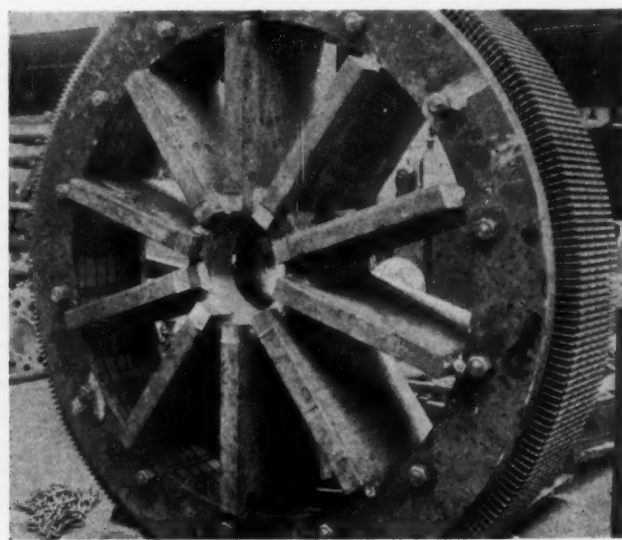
LARGE WELDED DIRECT-CURRENT ARMATURE ROTOR
